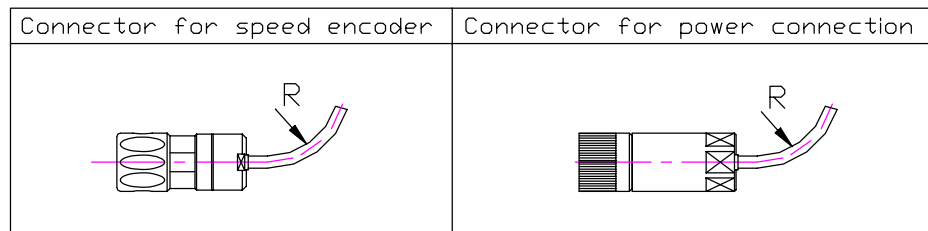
, AM 960A and AM 960AB - Dimensional Drawing
